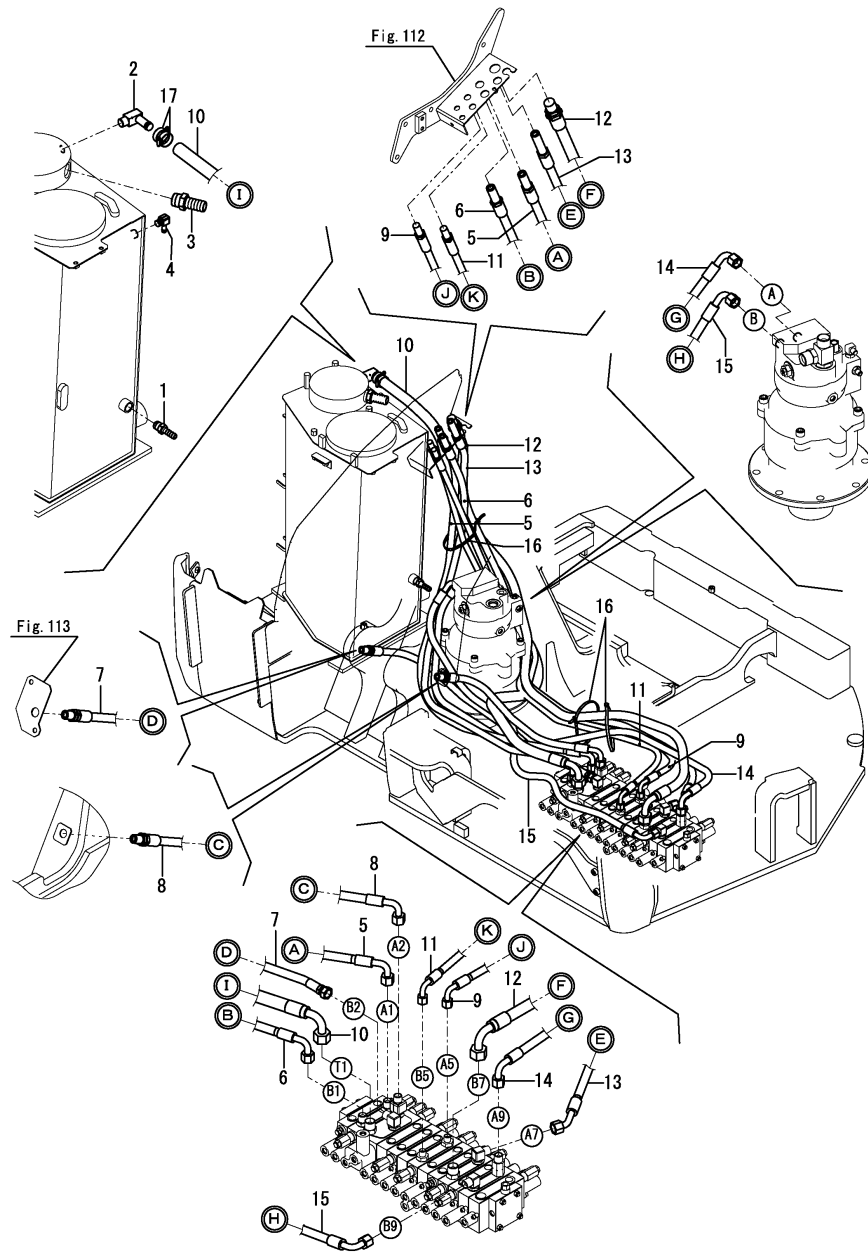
CONTROL VALVE - BULKHEAD, TURNING MOTOR & TANK
